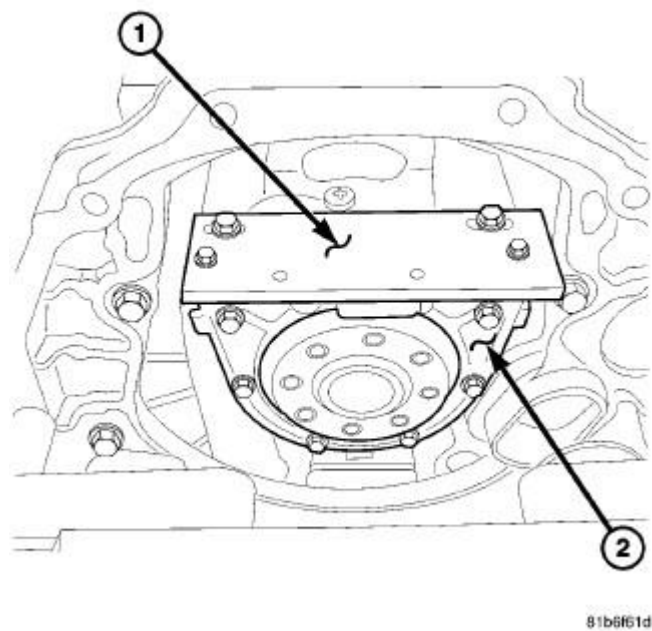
Front And Rear Seal Tool Installed Onto Rear Oil Seal Carrier
